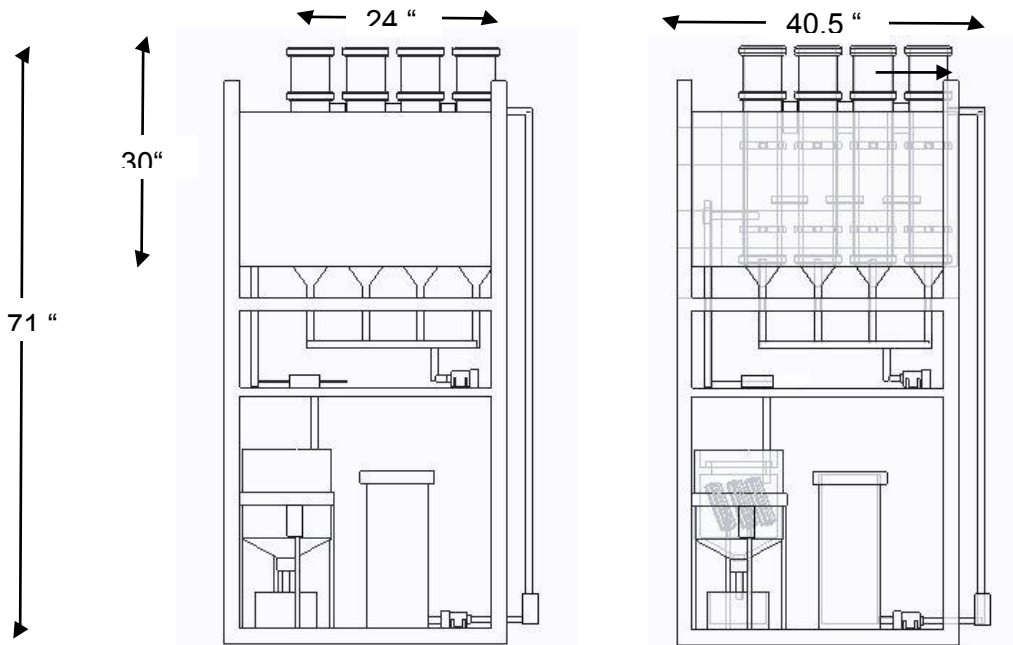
(Left) Wireframe view of airlift assembly, (right) hidden line view of airlift assembly. Both views are presented for installation and size reporting purposes.
